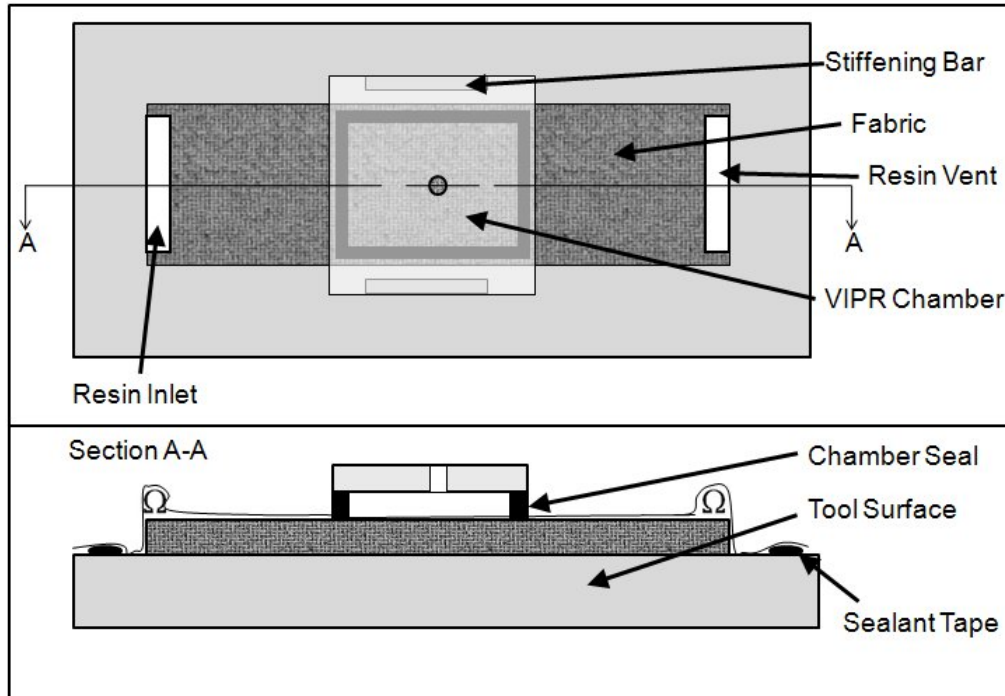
Top: Schematic top view of the VIPR process set-up with stiffening bars. Bottom: Schematic cross-section view of the identical set-up.
